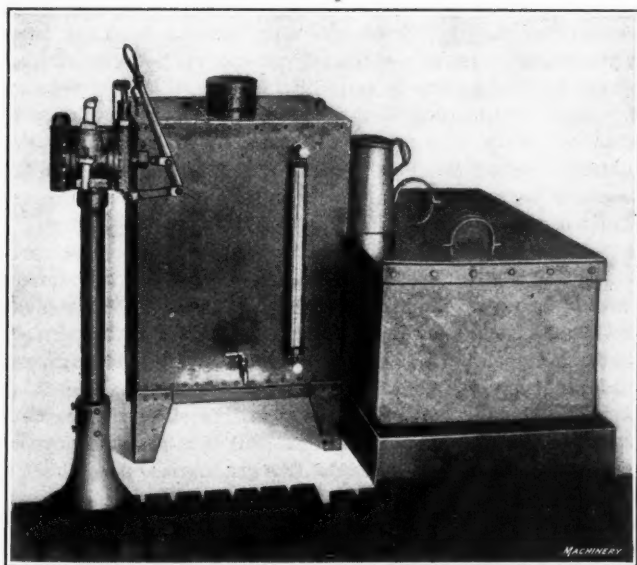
View of Kerosene Oil Filter shown in Fig. 67, set up in Hess-Bright Factory
